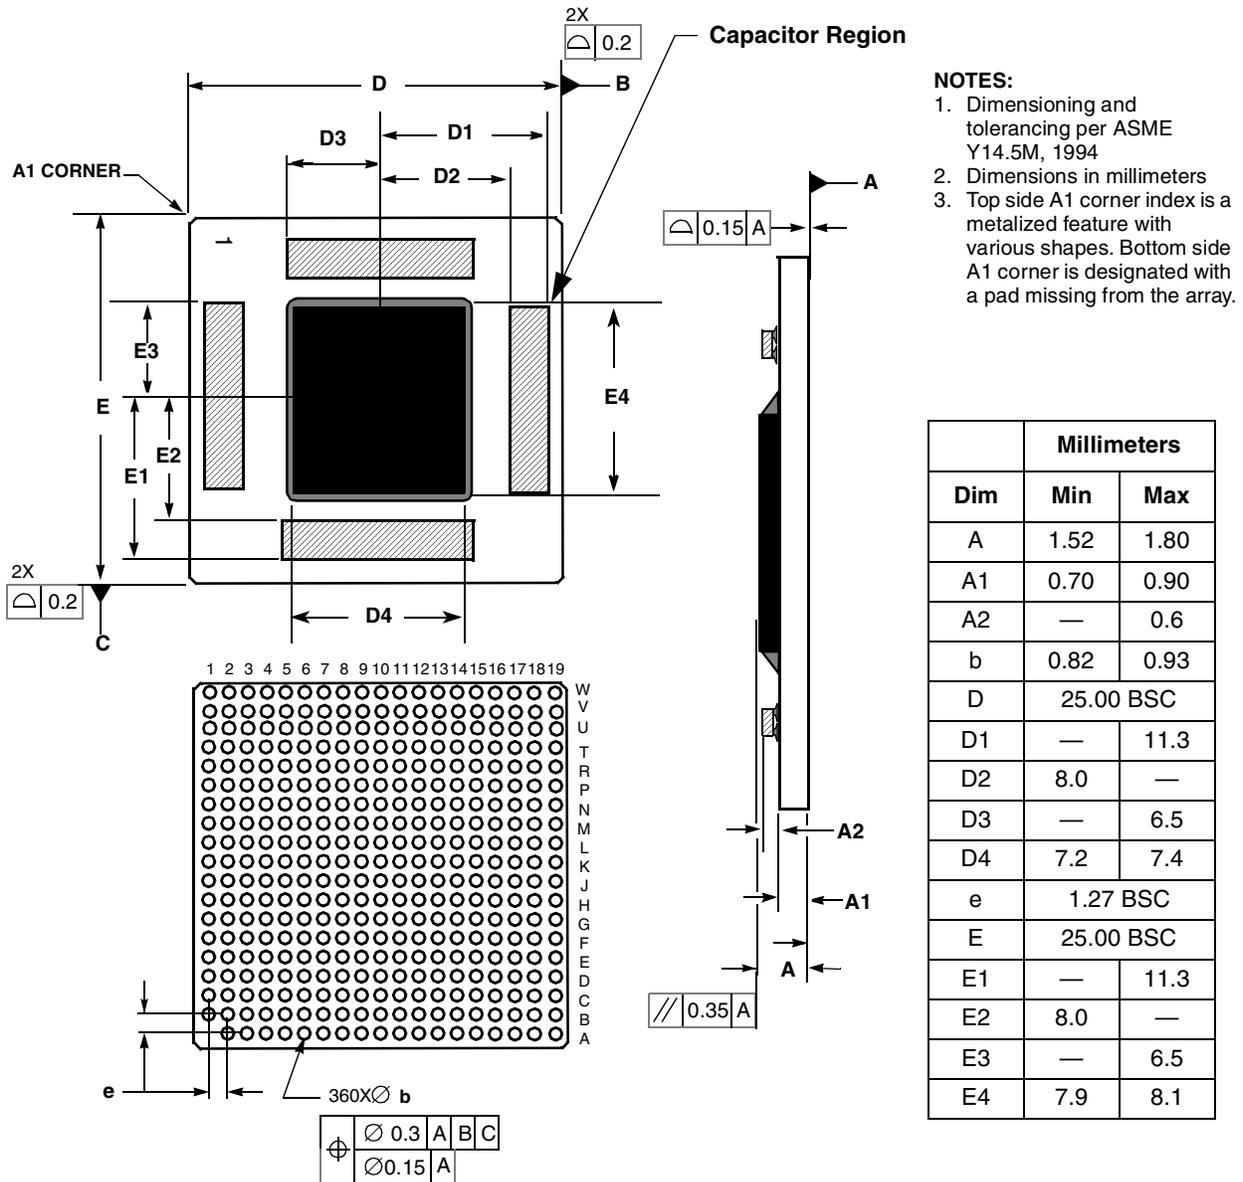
Mechanical Dimensions and Bottom Surface Nomenclature for the MPC7448, 360 HCTE LGA Package
